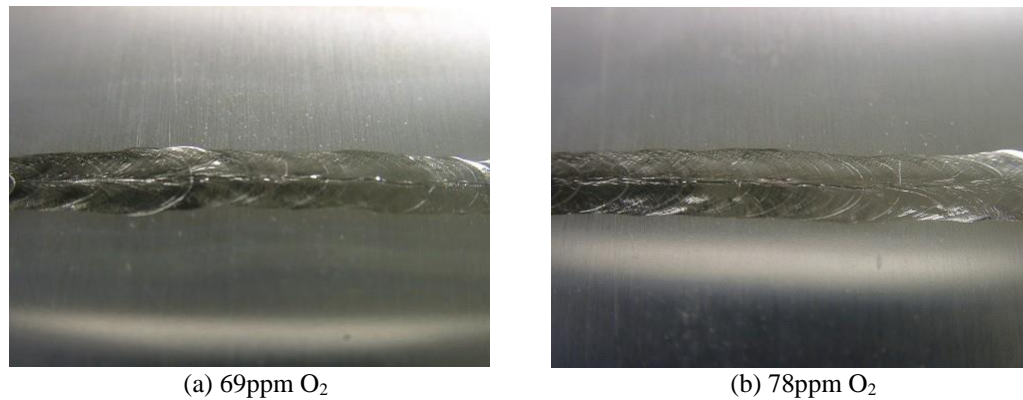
Typical microstructures showing bead cracking after TIG-Weld (GTAW) Mo sheet made by H.C. Starck, Inc. ^[34]
